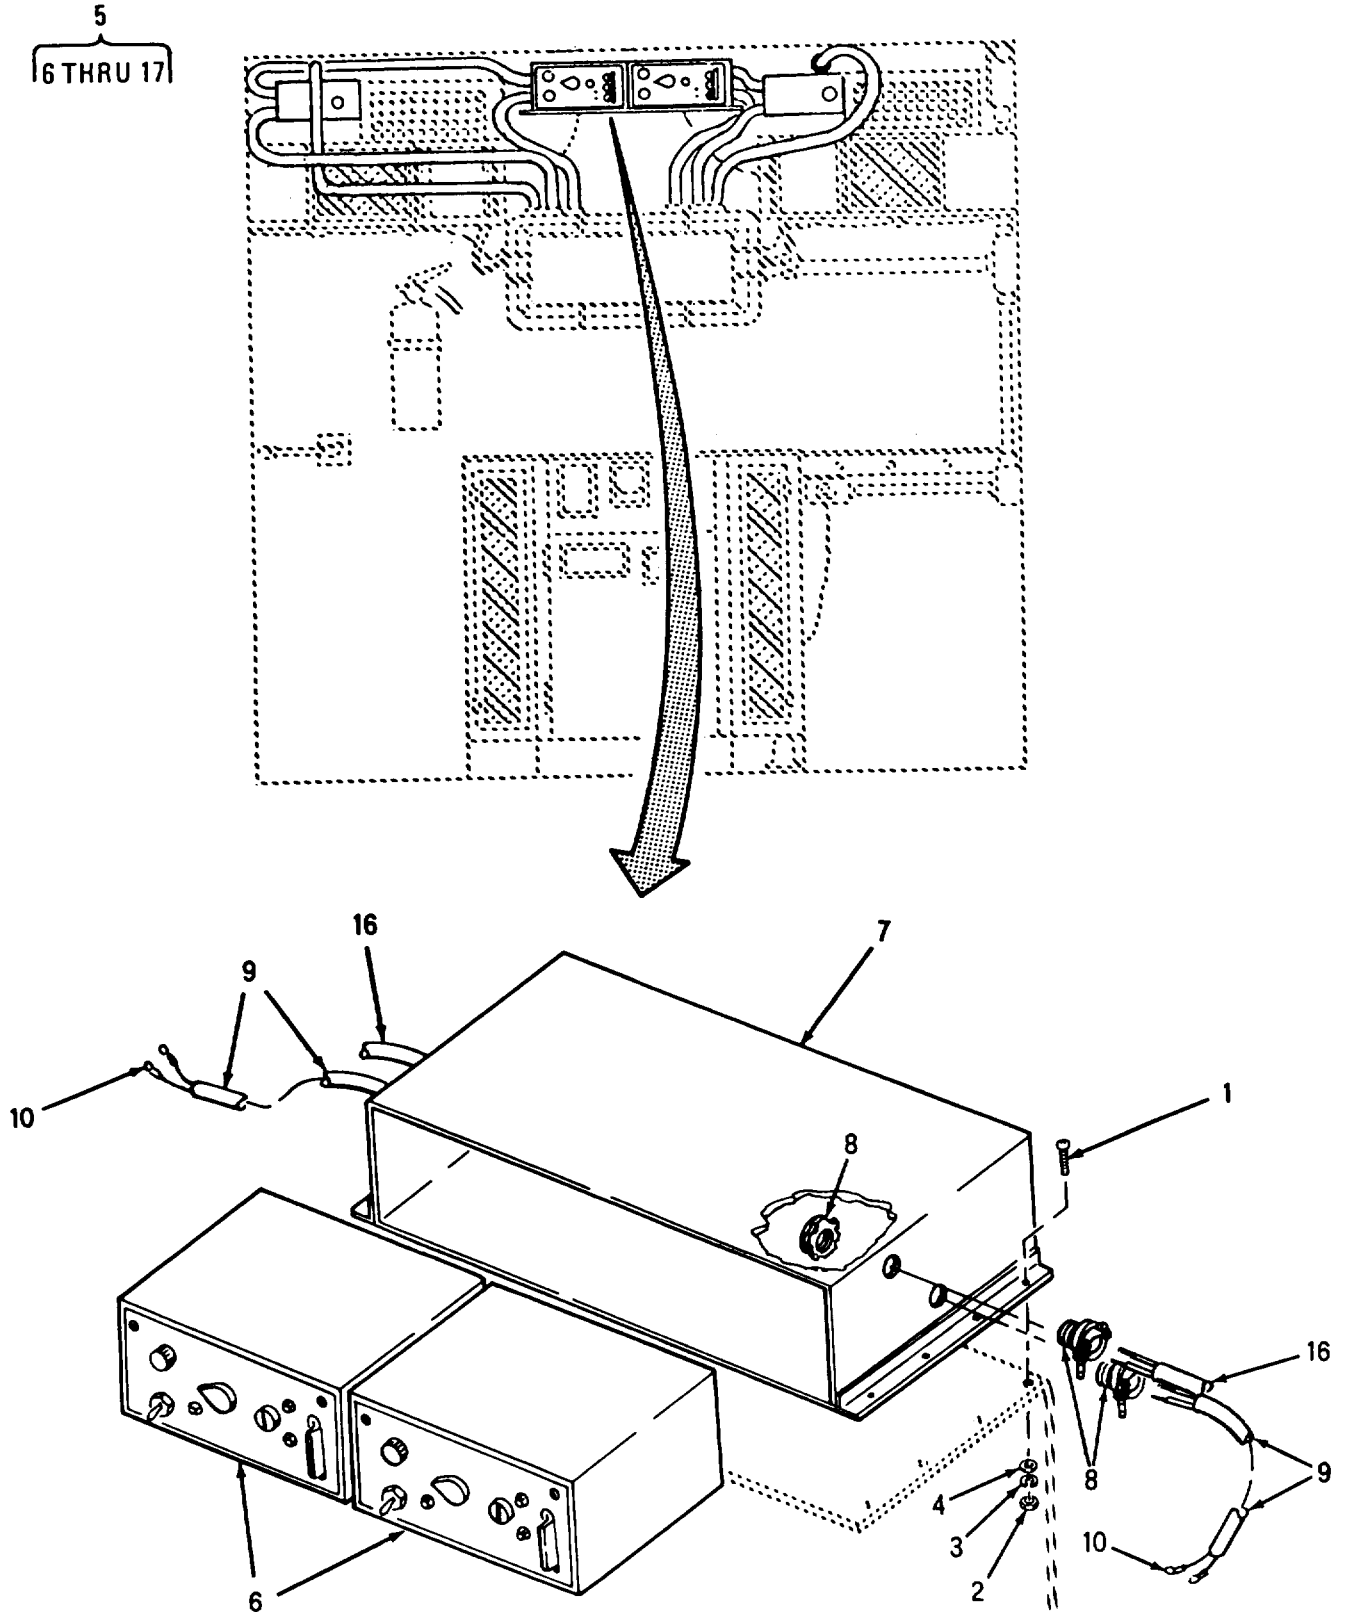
Environmental Control - Air Conditioner Control Assembly (Sheet 1 of 2)
